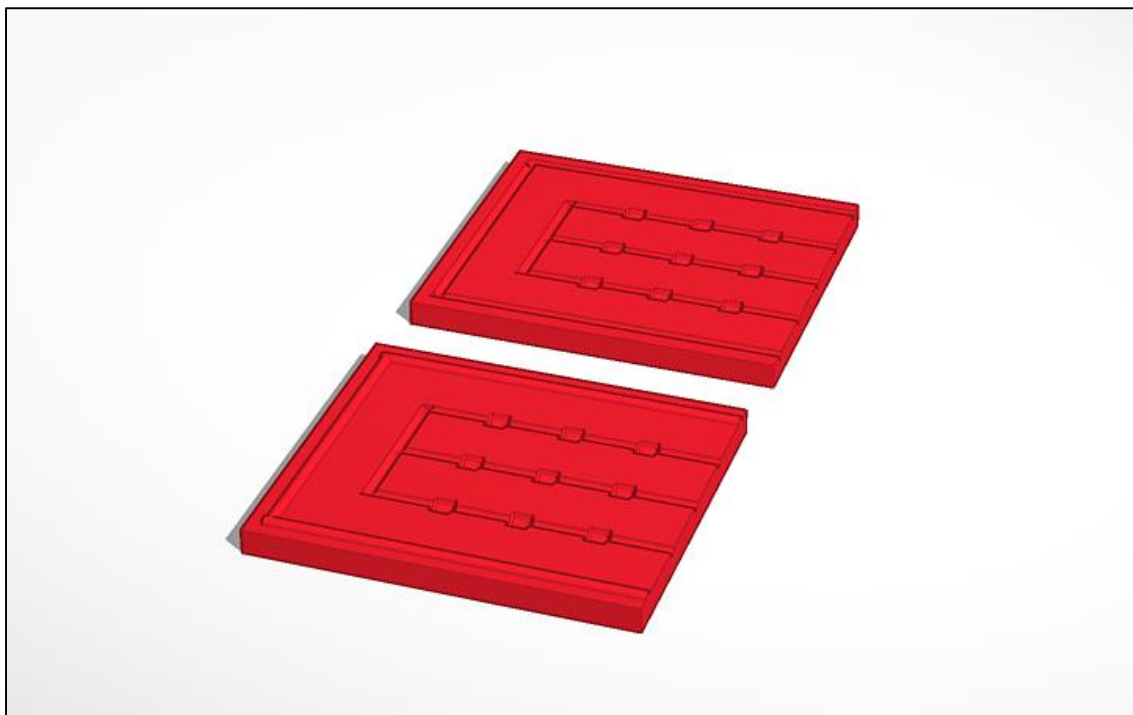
Optimised mould design for the 3D-printed mini-tablets
